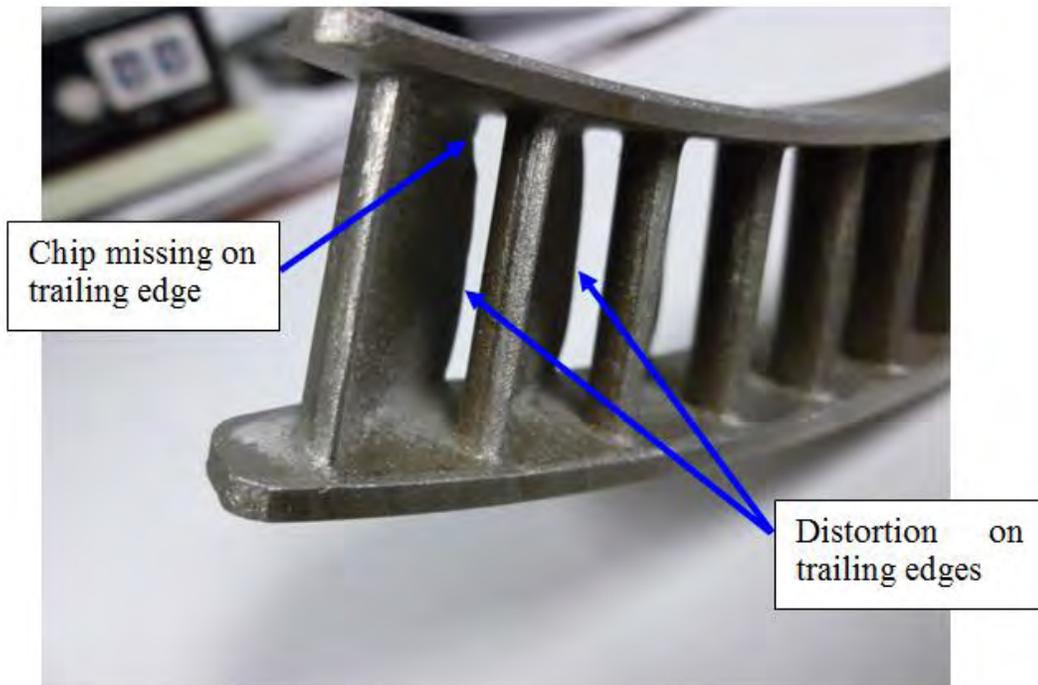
View of the trailing edges on the 316 SS inlet guide vane.
